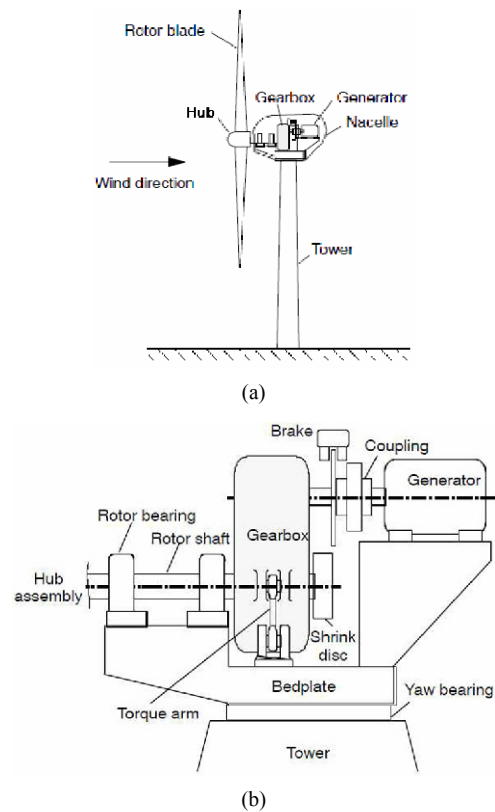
Horizontal-axis wind turbine: (a) configuration; (b) detailed components.
